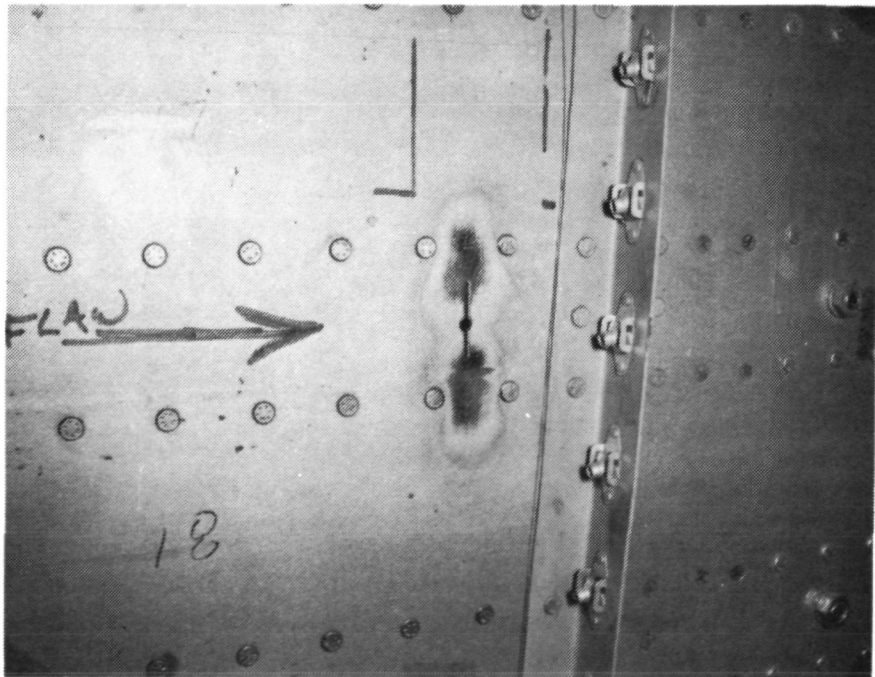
CUT IN LOWER SURFACE WING PLANK -
